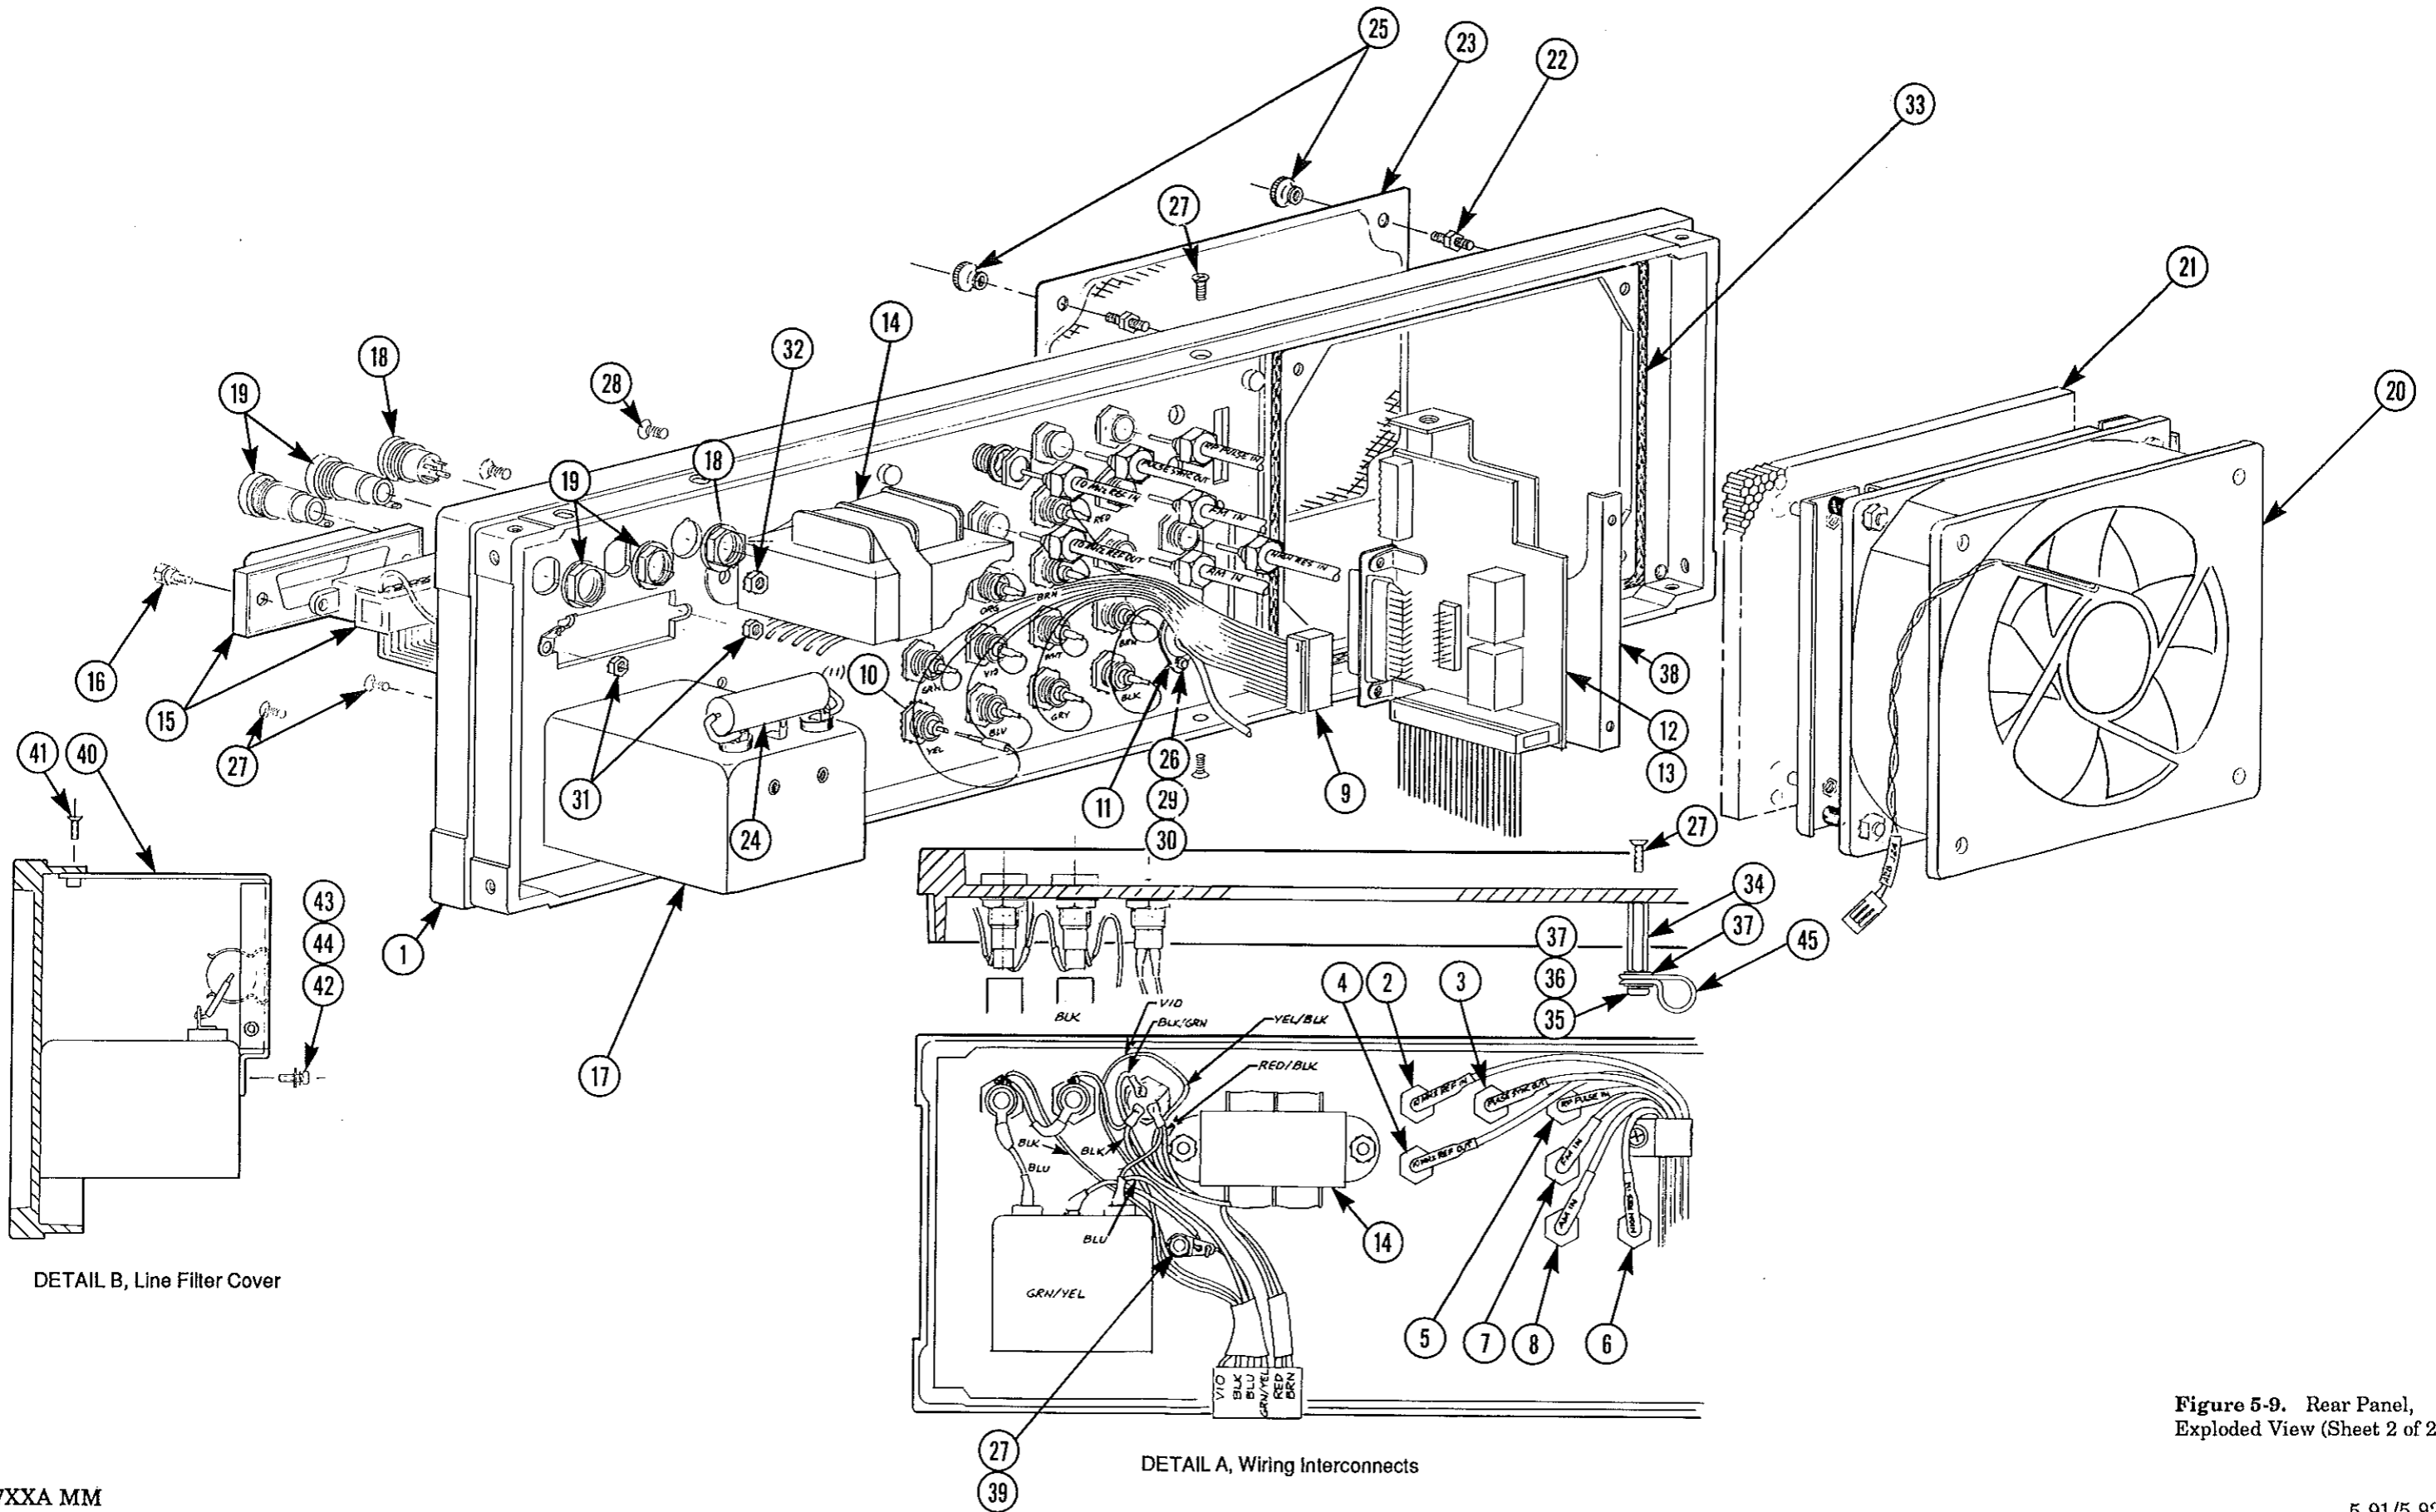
Rear Panel, Exploded View (Sheet 2 of 2)
